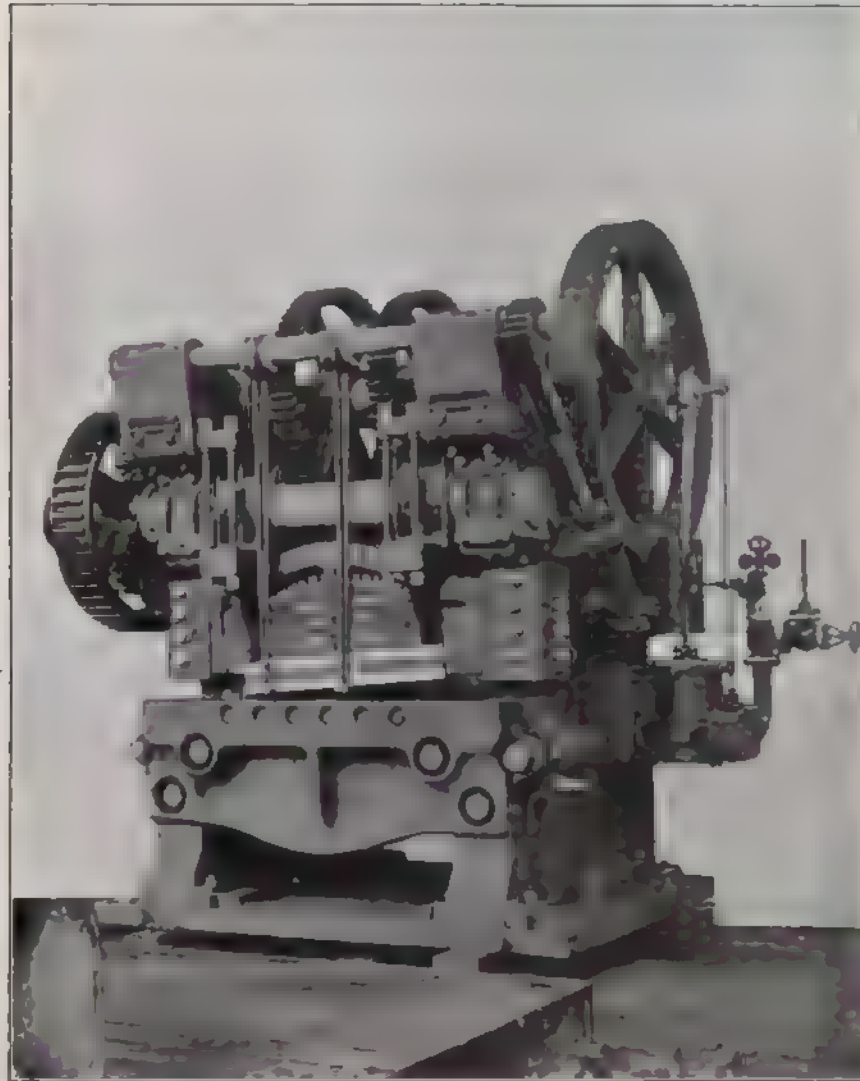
60-IN. PLATE SHEAR, TO CUT 2 IN. COLD STEEL PLATES, BUILT FOR HOMESTEAD WORKS.
